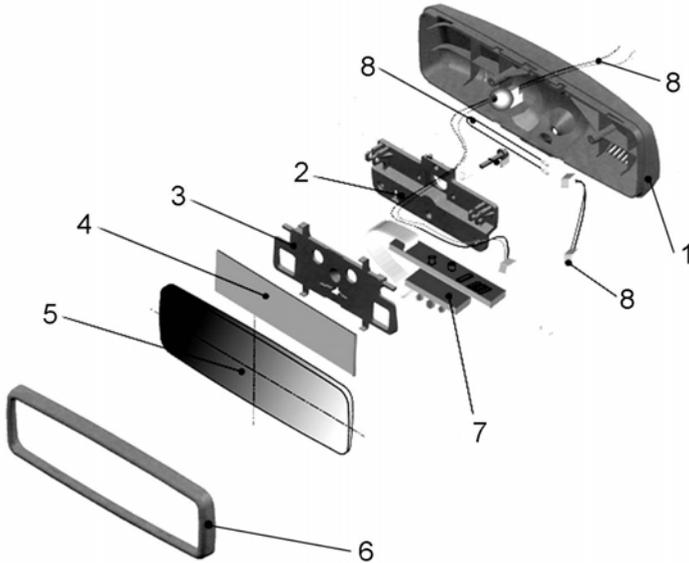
Inside mirror main components: 1) casing; 2) support housing; 3) movable plate; 4) adhesive strip; 5) prismatic reflector; 6) frame; 7) electronics; 8) harness.
